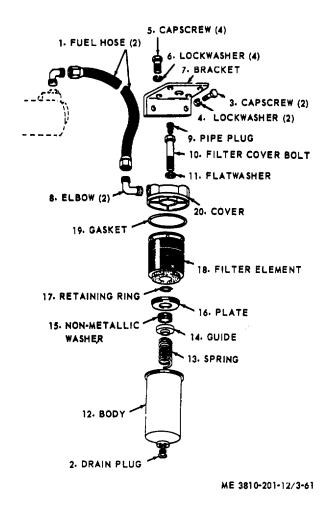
Fuel filter (secondary), removal, disassembly, reassembly and installation (engine model 687C-18-ES).
